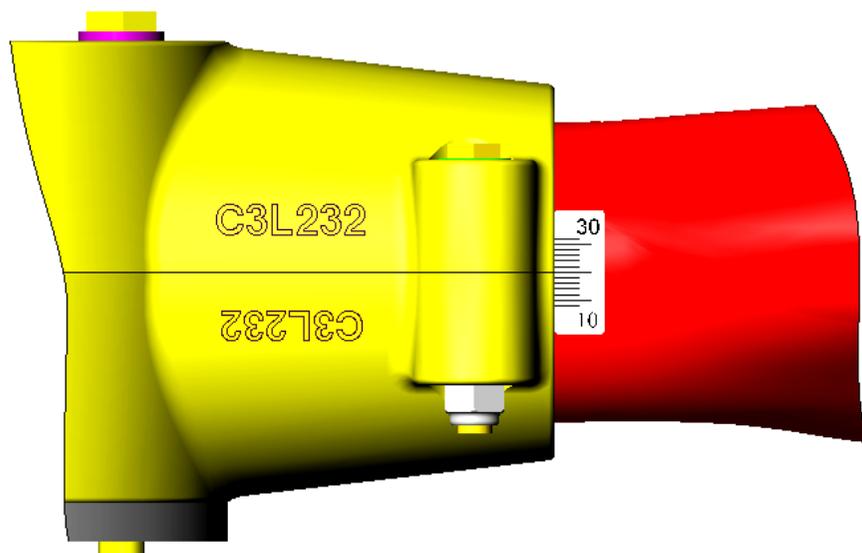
Propeller installation on the flange of the reduction gear of the Rotax 503, 582 and other similar engines
